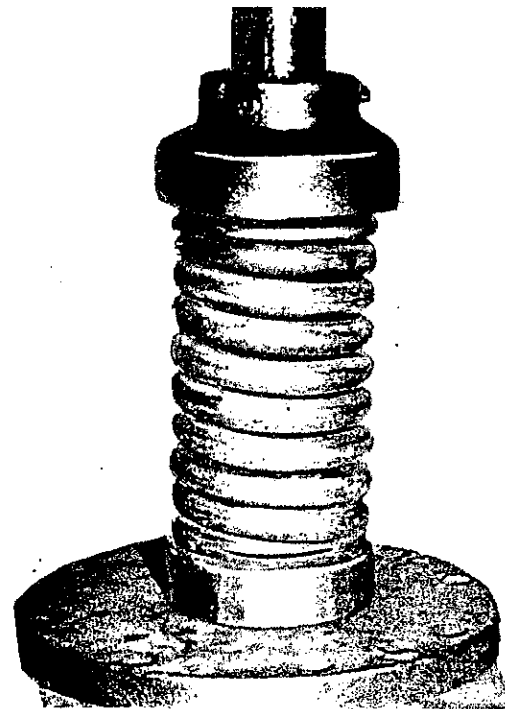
ASSEMBLY COMPLETE - compress snubber a number of times to check operation
